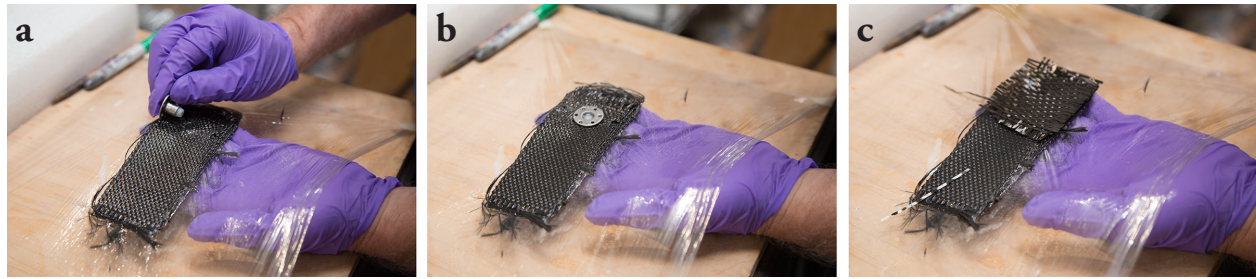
(a) Insertion of weld nut hardware into the cloth; a nylon set screw prevented epoxy from flowing into the threads. (b) Flange of weld nut on top of carbon fiber layers. (c) Additional carbon fiber layers added on top of weld nut's flange. (Courtesy of W. Walker, ©The Metropolitan Museum of Art)
